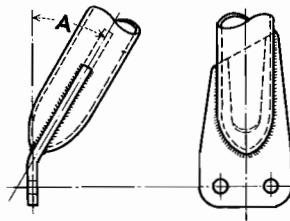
Close-up of a section of finished tubular structure to show types of welded joints.
